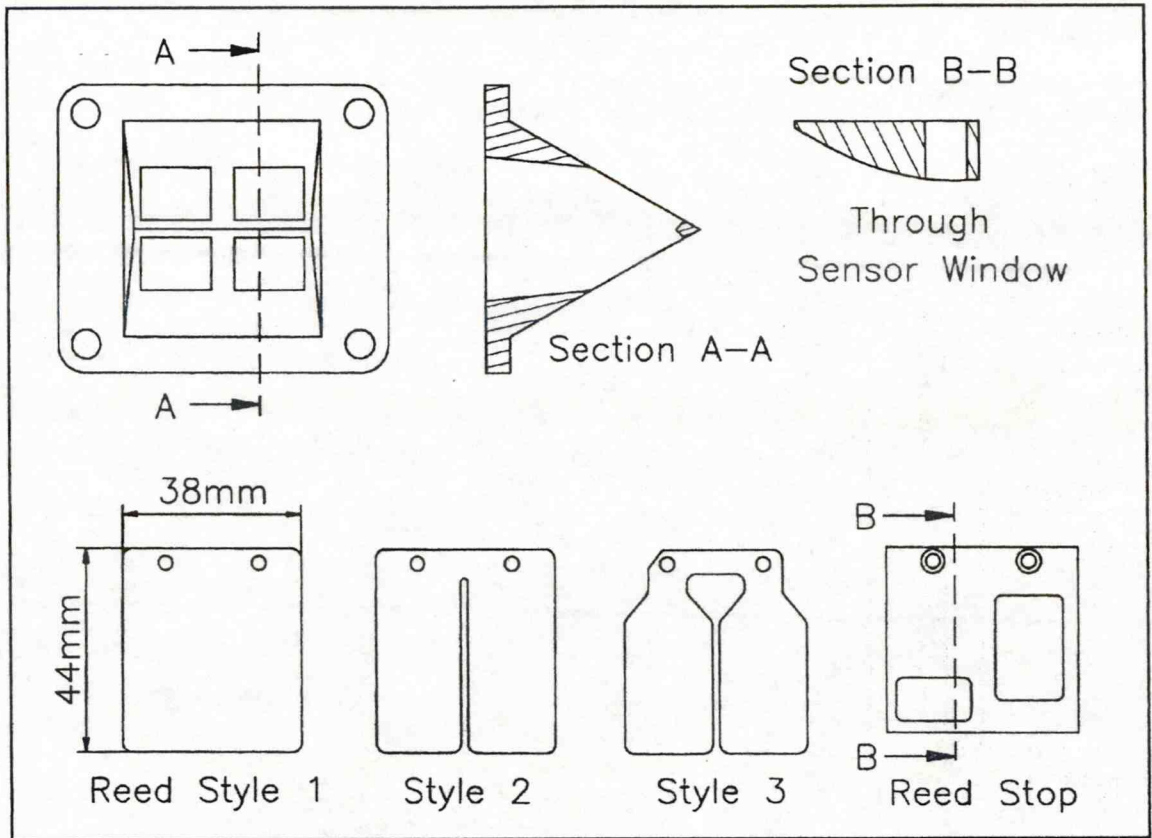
Reed block, machined reed stop and 3 reed styles.
